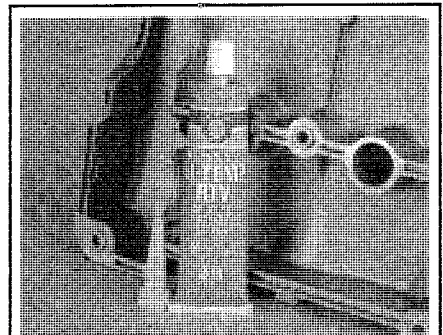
On some engines, RTV is used instead of gasket material to seal components
